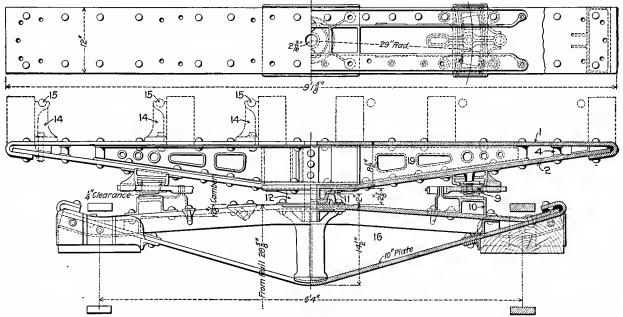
"Simplex" Body and Truck Bolsters with Susemihl Roller Side Bearings. Simplex Railway Appliance Company.
